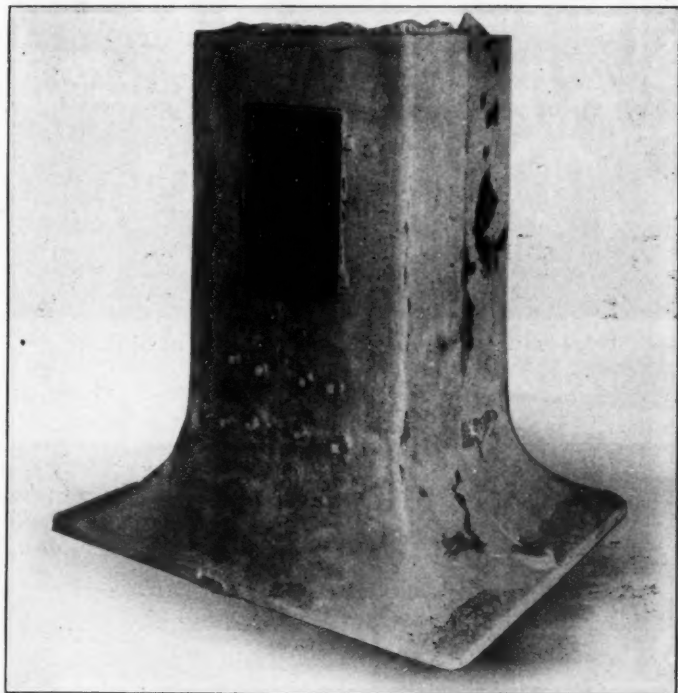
THE CASTING TAKEN FROM THE MOLD SHOWN IN FIG. 1
